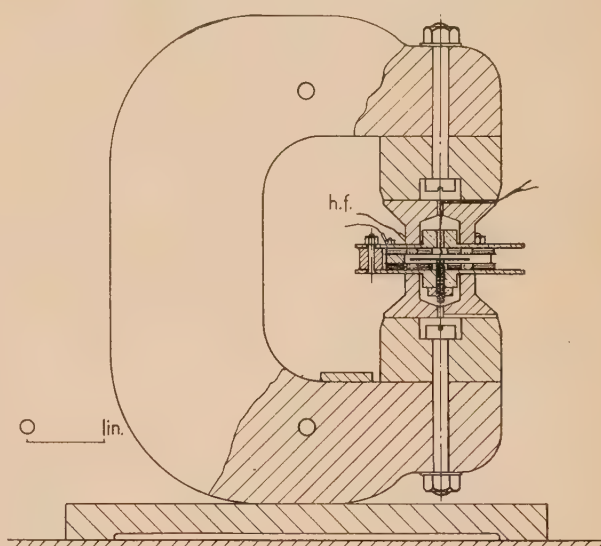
Assembly of inductor-driven oscillating disk for damping measurement
